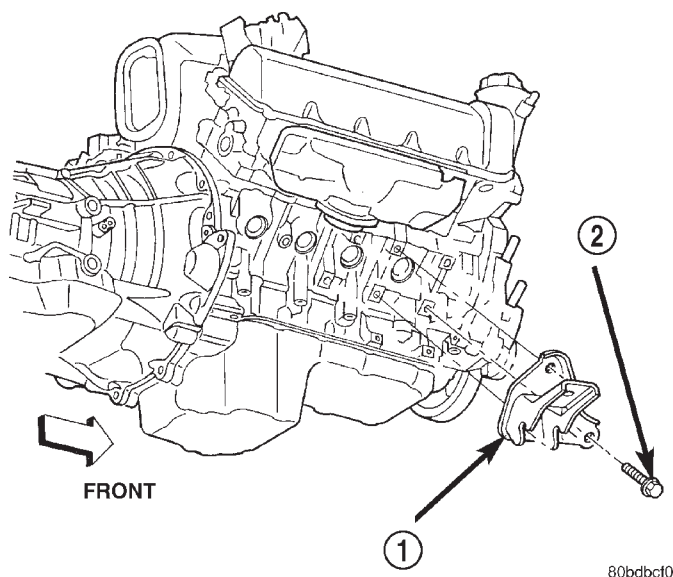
Engine Insulator Mount 4x4 Vehicle—Right Side
